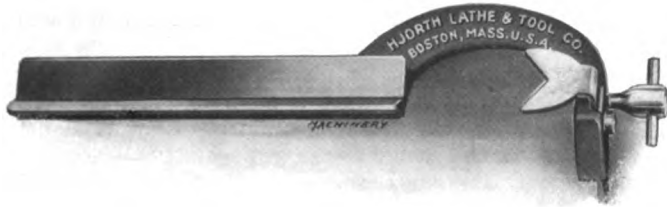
Hjorth Gage for Drills up to 1 Inch in Diameter
